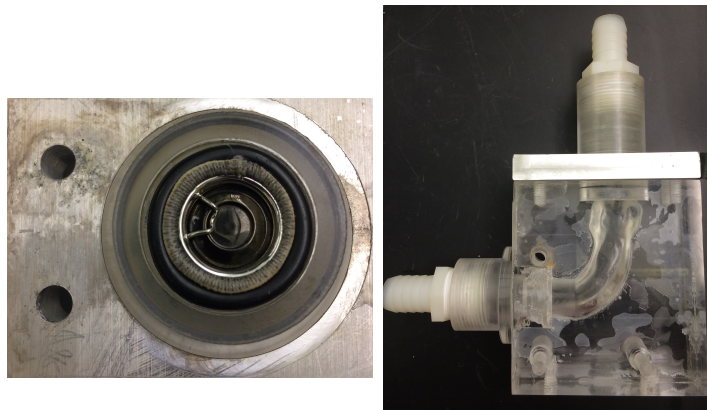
(Left): O-Ring Modification, (Right): Final Assembly
